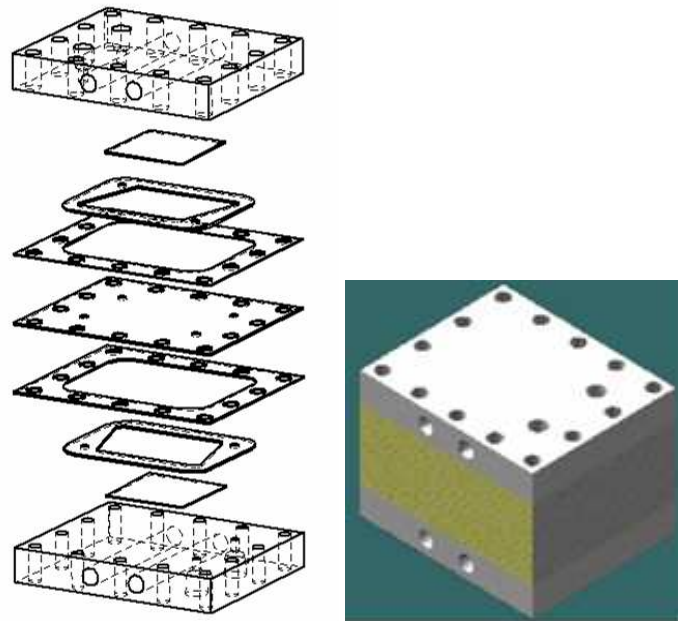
Exploded view of the second generation micro-reactor. The assembled version on the right show 25 layers
